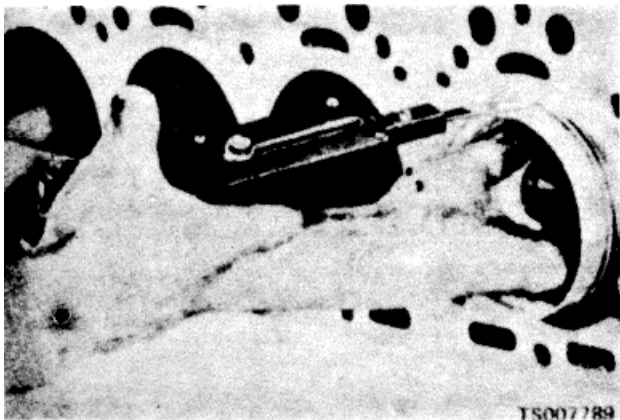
Checking Piston Fit in Cylinder Bore.
